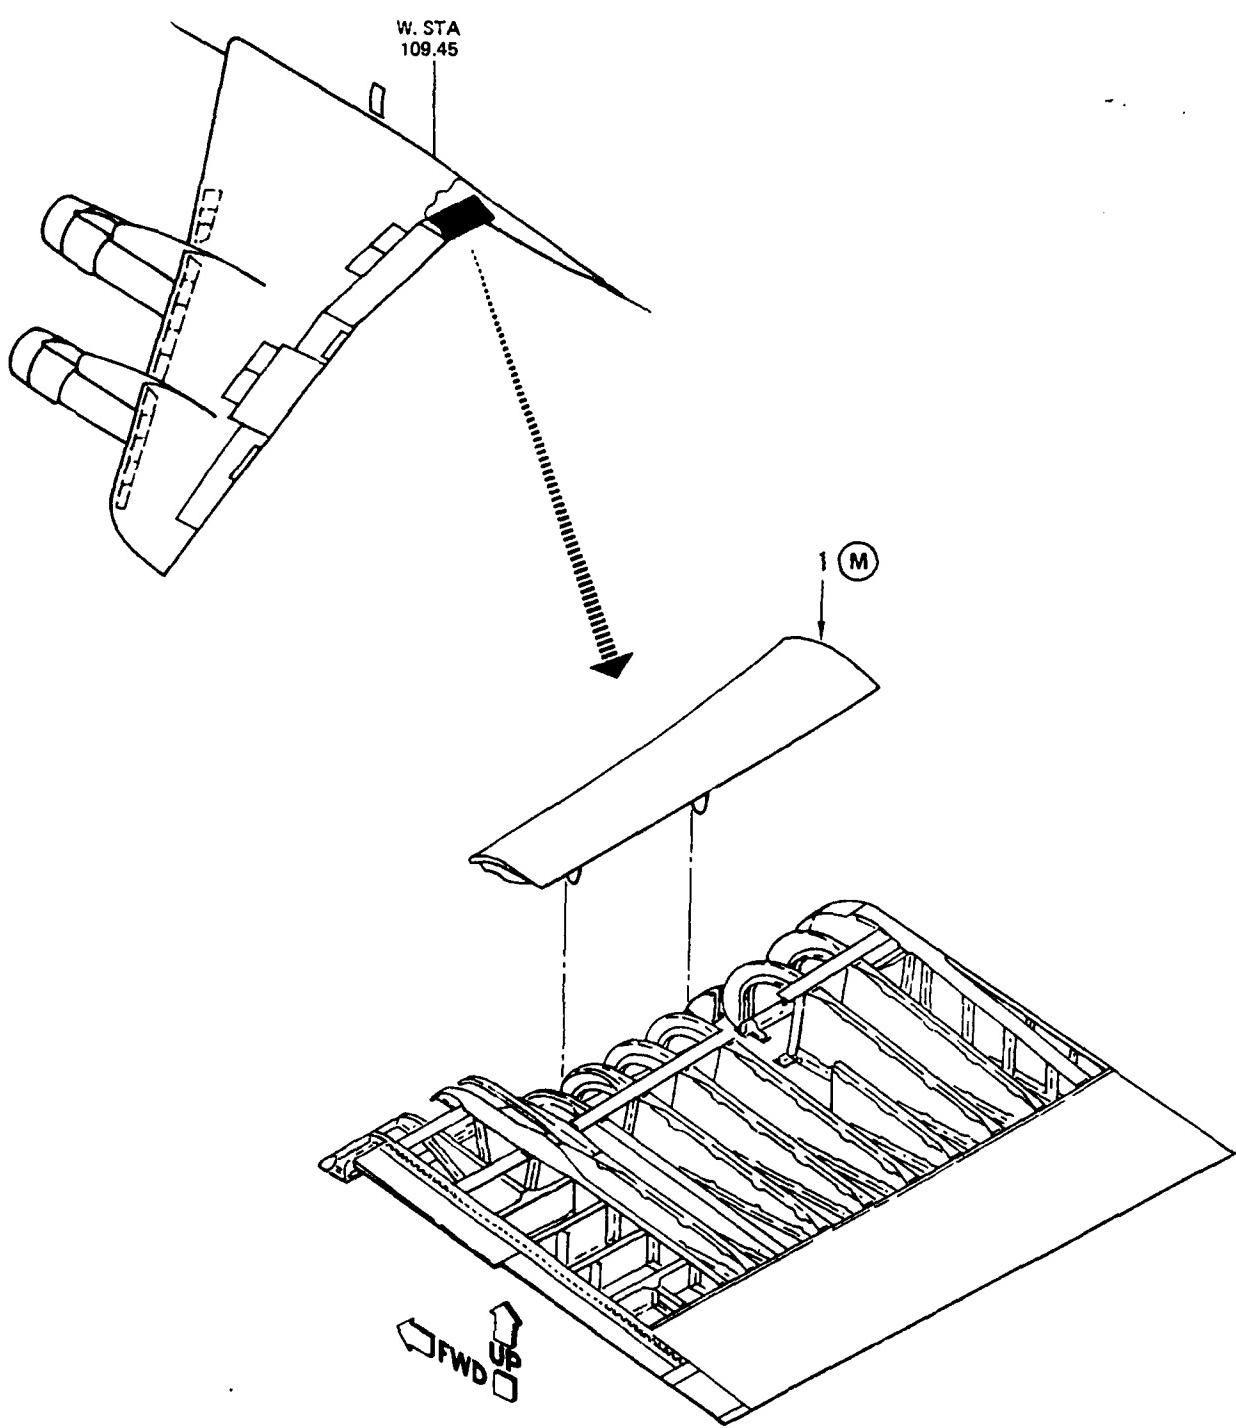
Fillet Flap Flaperette Corrosion Inspection Guide (Sheet 1 of 2)
